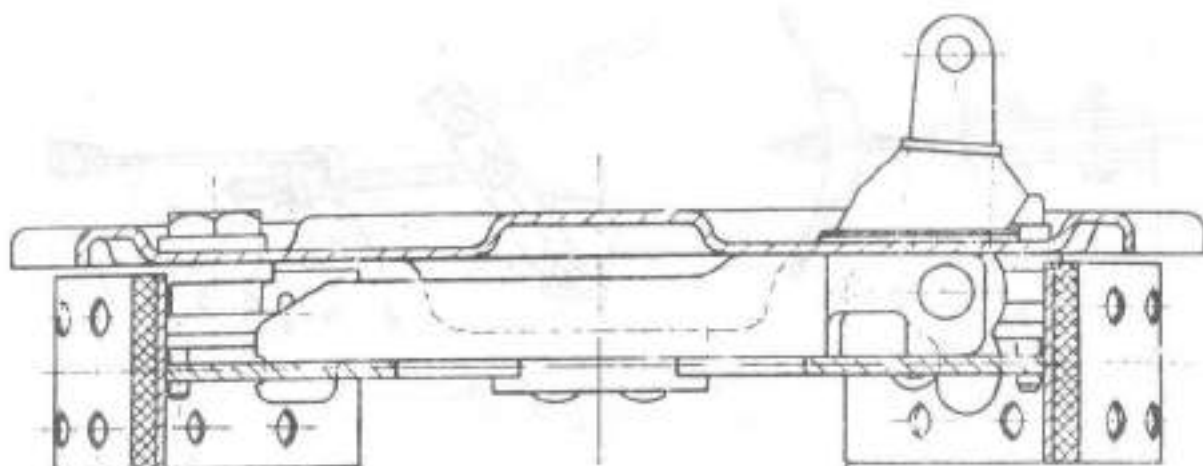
REAR WHEEL BRAKE ANCHOR PLATE.
